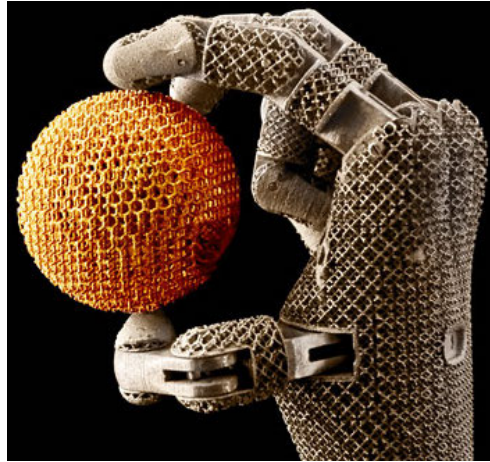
Example of a component which is impossible to manufacture by traditional manufacturing techniques, yet is able to be printed despite the intricate lattice structures. [13].
